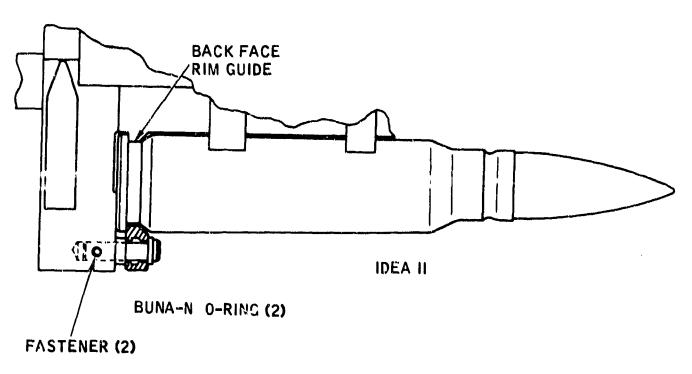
Guide Bar Back Face Rim Guide, Feeder Side Self-Adjusting for Excess Loading
